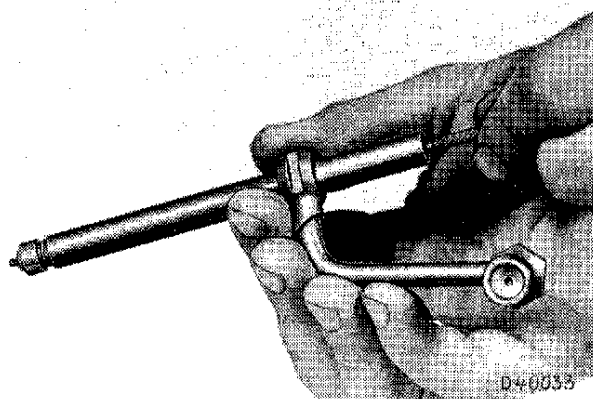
Cleaning Nozzle Needle Seat in Nozzle Body with Special Tool No. 16482
